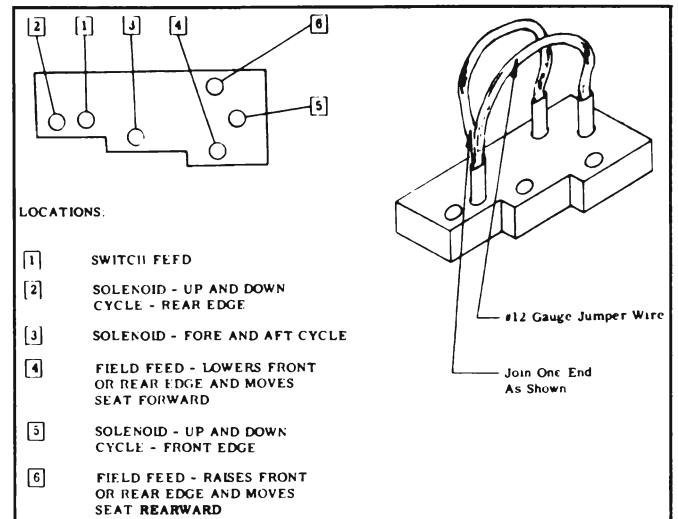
Checking Six-Way Seat Switch Terminal Block
